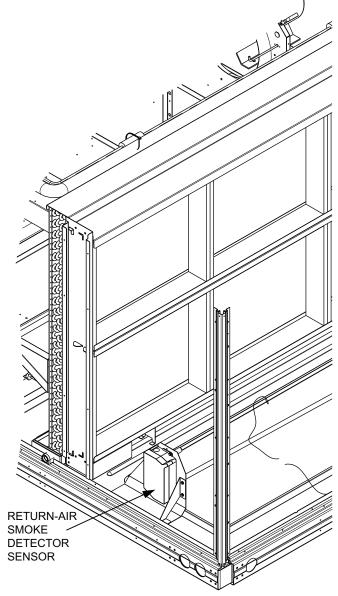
Typical Return-Air Smoke Detector Location (without Economizer)
